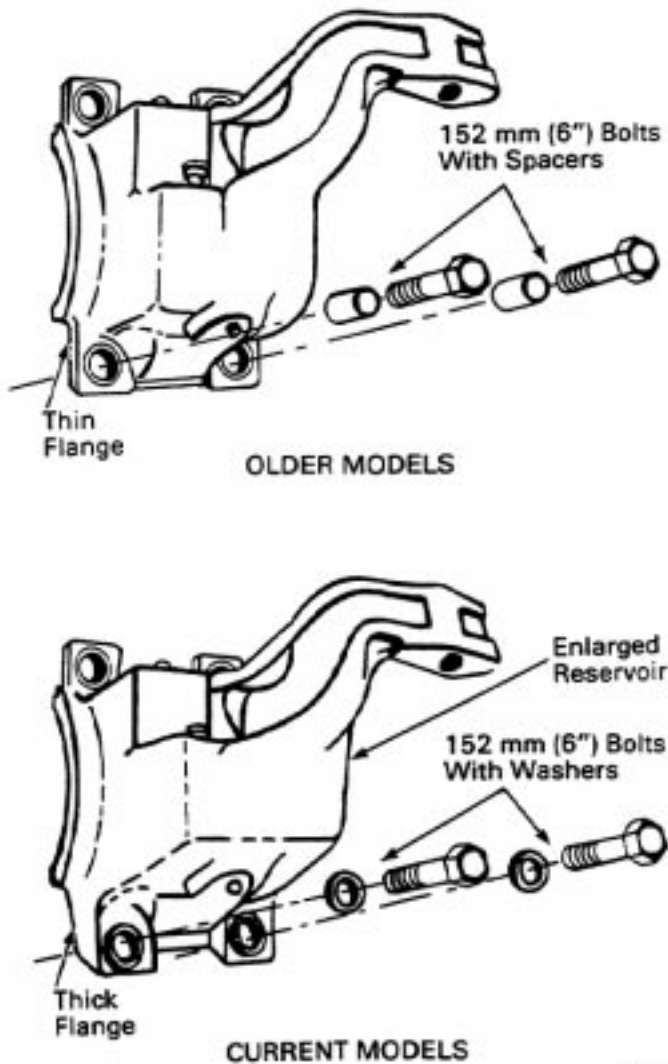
Lower Pinion End Support Bearing Cap Bolts
